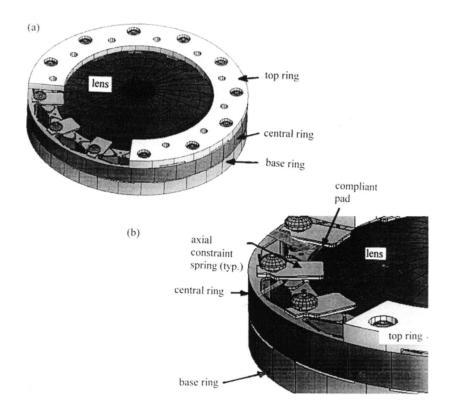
The prototype axial constraint used in the prototype mounting design. (a) Cutaway view, (b) close-up view. (From Kvamme et al.⁴⁴)
